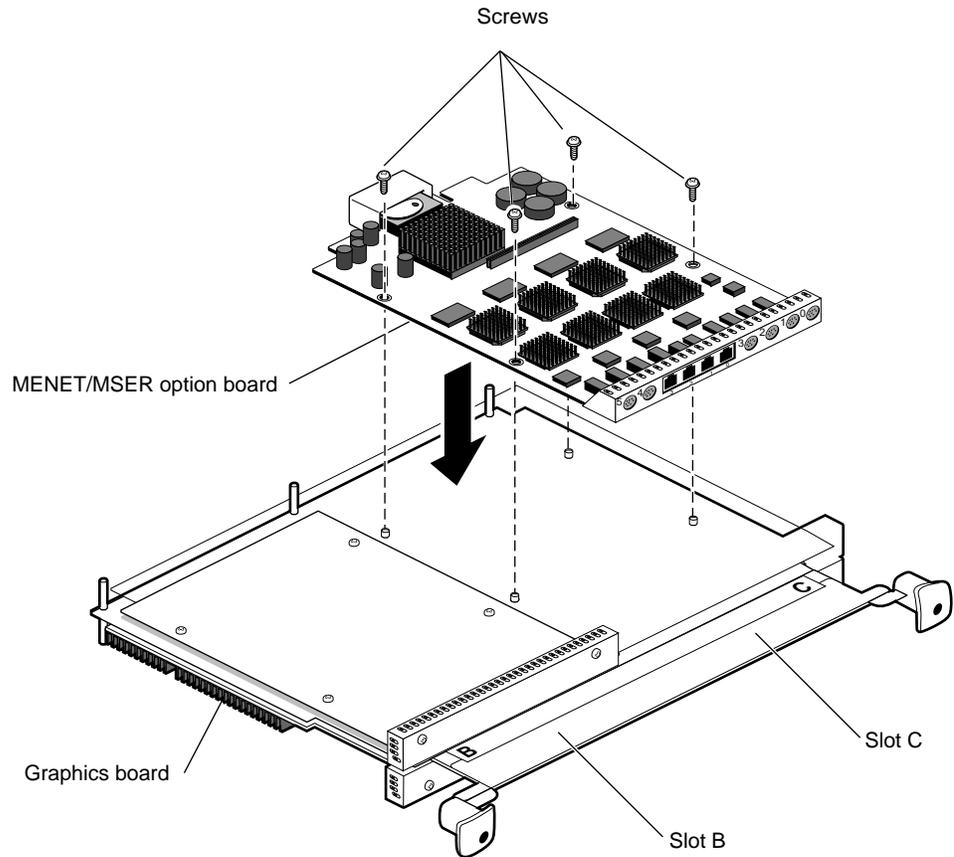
Attaching the MENET/MSER Board to the XIO Module
